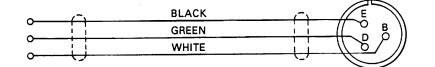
Cable Assembly CX-4693C/U (stub), drawing number SC-D-374106.
